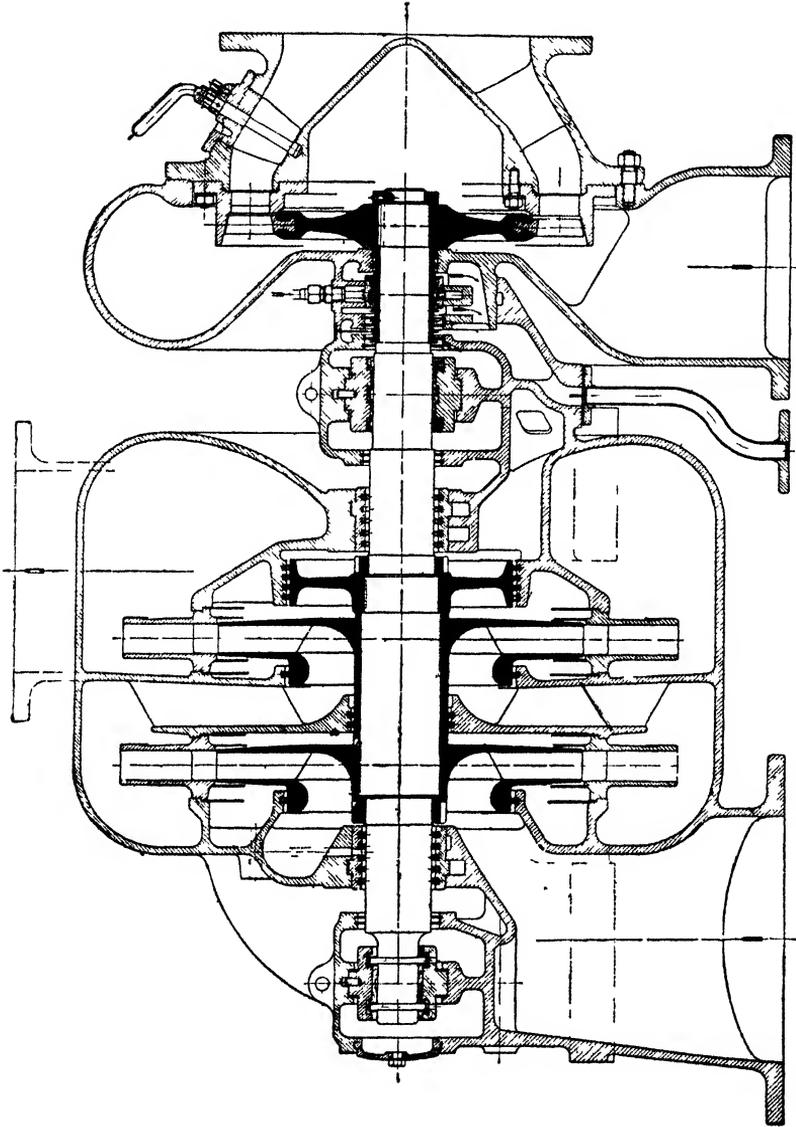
Sectional View of the Exhaust-gas Turbo charger (as fitted in the Roby Castle)
